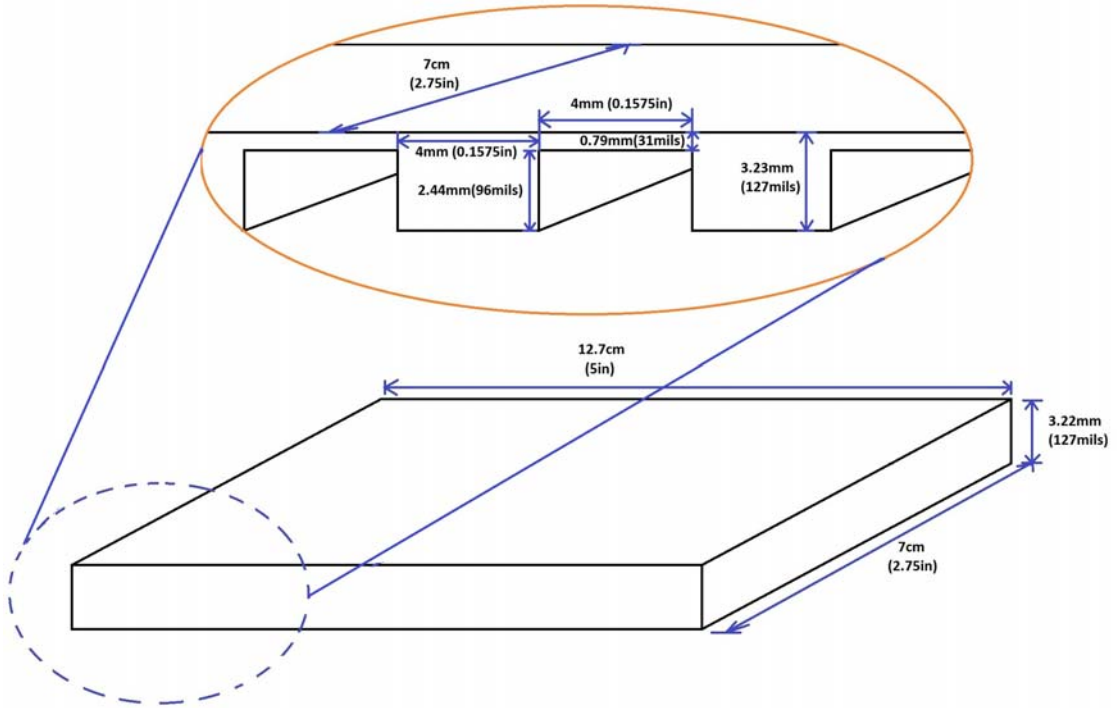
Final Propulsive Phase PVDF Insole Core Dimensions
